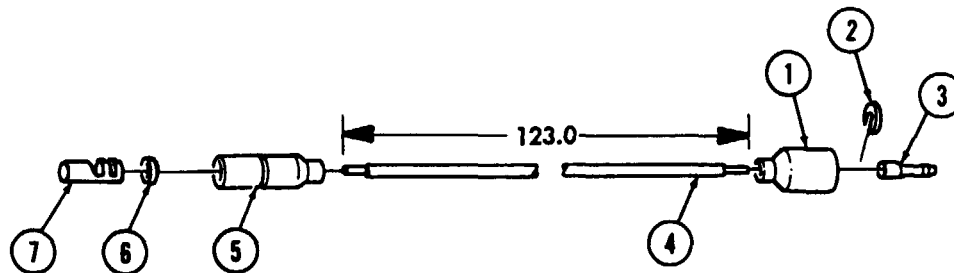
Wire "F" - Passenger Side Siren Switch to Adapter Connector "B"
